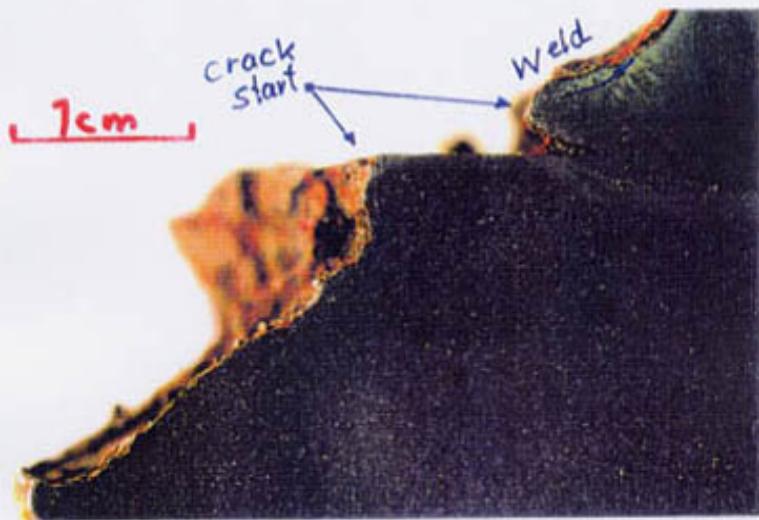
Crack initiation from partial penetration weld roots in fig.8
